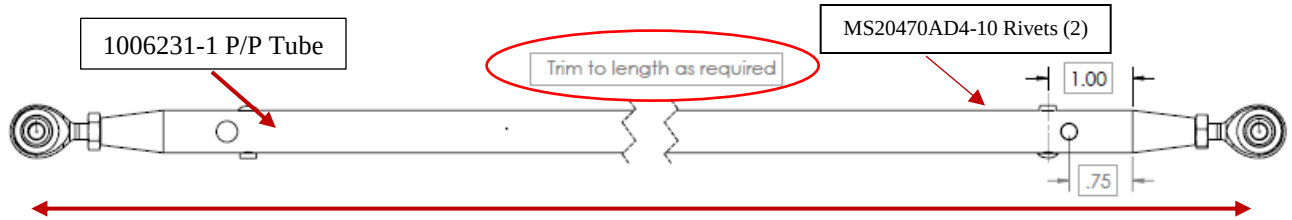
PUSH PULL TUBE MODIFICATION
